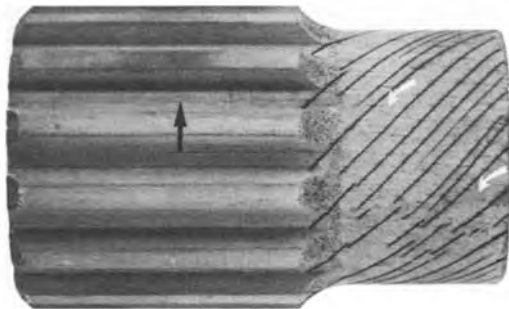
Torsional fracture of a $1\frac{1}{2}$ in. diam case-hardened steel shaft, illustrating cracking of the hard, brittle case and transverse shear fracture at the right end across the relatively soft, ductile core. Hot etched to reveal twisting and distortion of the originally straight grain flow in the cylindrical shaft (white arrows). Note that the black 45° brittle-fracture cracks (emphasized by the hot etching) are in the opposite direction to the twisting. This is because the cracks are always perpendicular to the tensile stress component that caused them, whereas the grain-flow distortion tends to proceed in the same direction as the tensile component. The black arrow on the spline indicates the direction this end was twisted.
